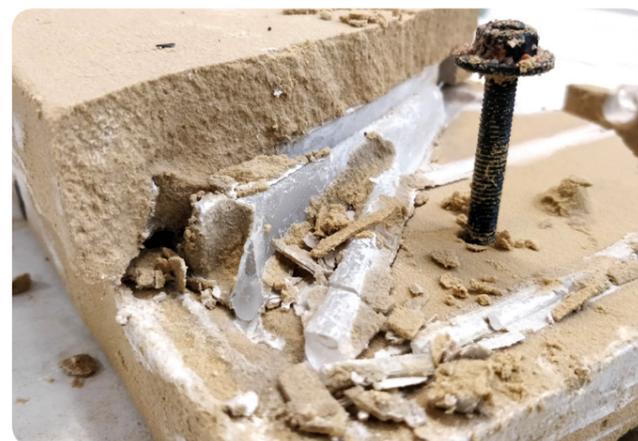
c: On breaking the mould, half casted pieces of glass can be observed. Also, nuts & bolts are burnt and are fused together.
